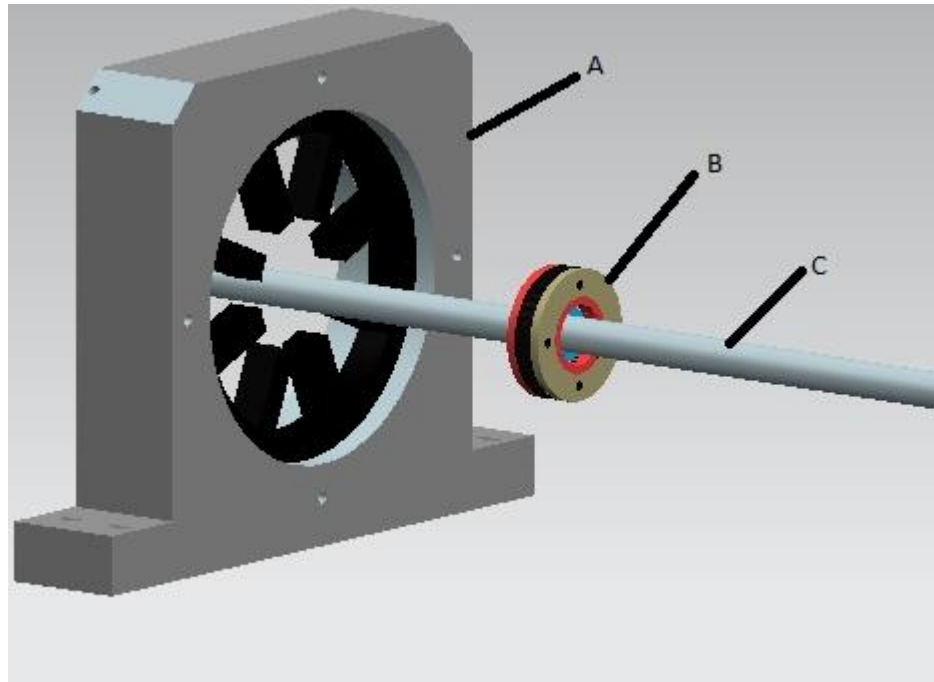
Rotor magnetic bearing assembly (A= magnetic bearing housing, B=Rotor (with lamination, cone clamping, rotor core), and C=Shaft)
